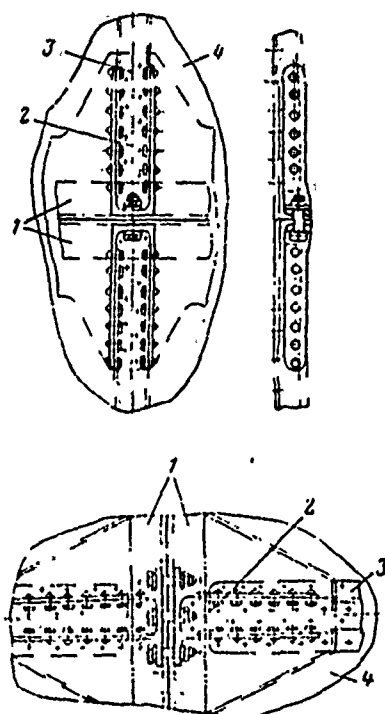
Butt Joints of Longitudinal Fuselage Elements:
